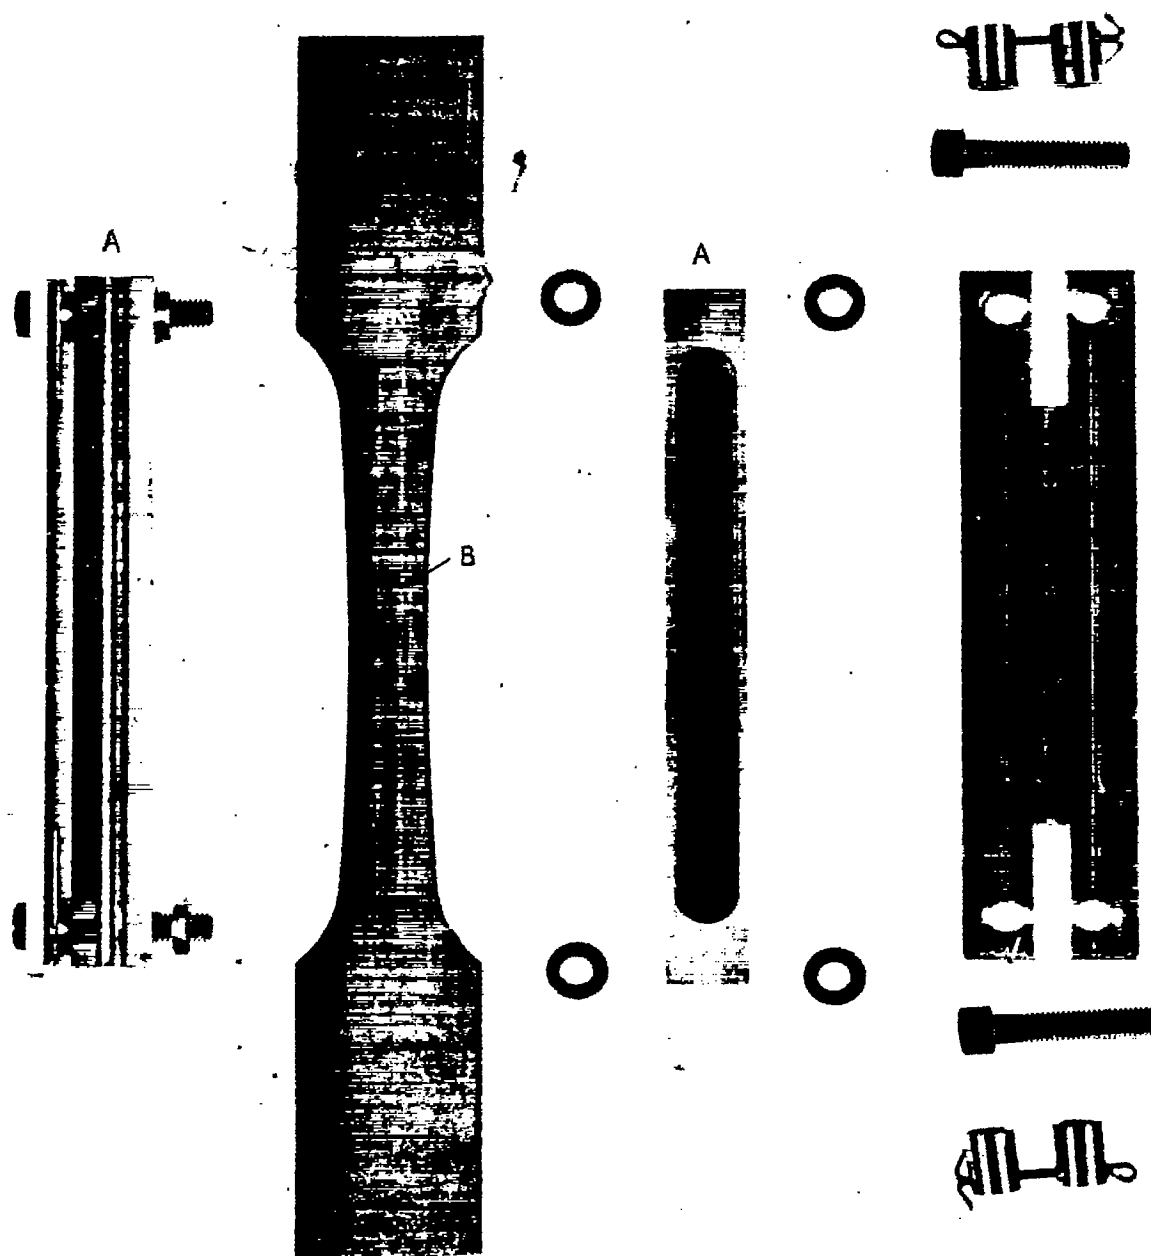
Special wire gage mounted on a fatigue specimen and guide for this specimen.
